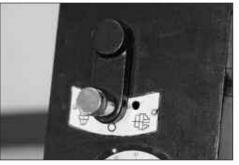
Lathe/Mill Clutch Shown in the Neutral Position
